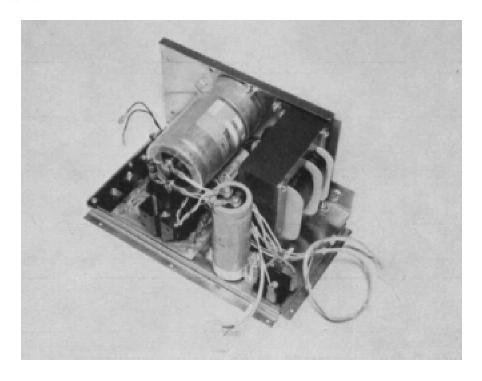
Sol-20 power supply subchassis assembly. (Rear of subchassis at left.)
